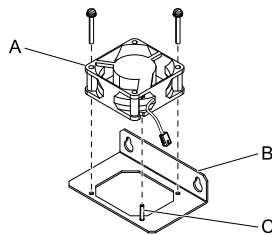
Remove the Circuit Board Cooling Fan Unit
